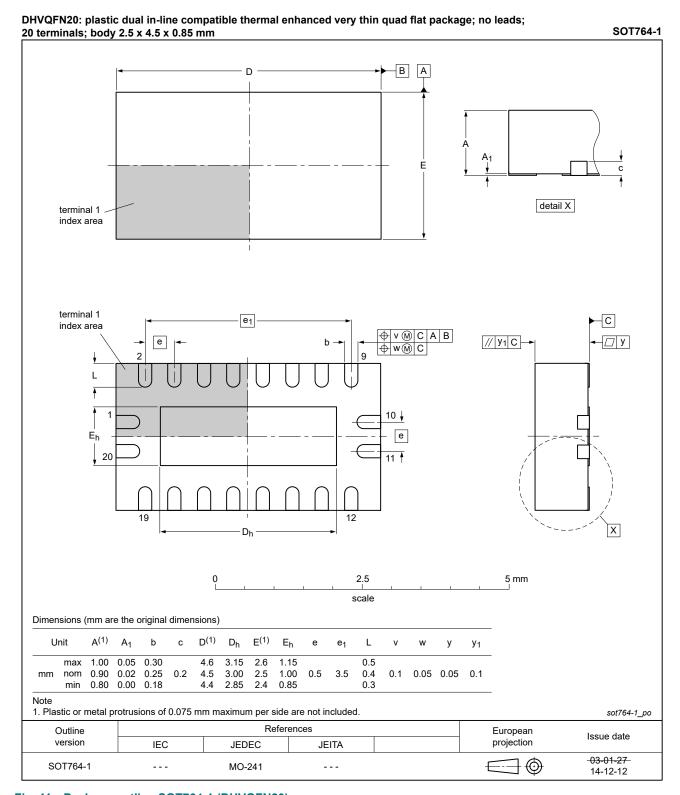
Package outline SOT764-1 (DHVQFN20)
